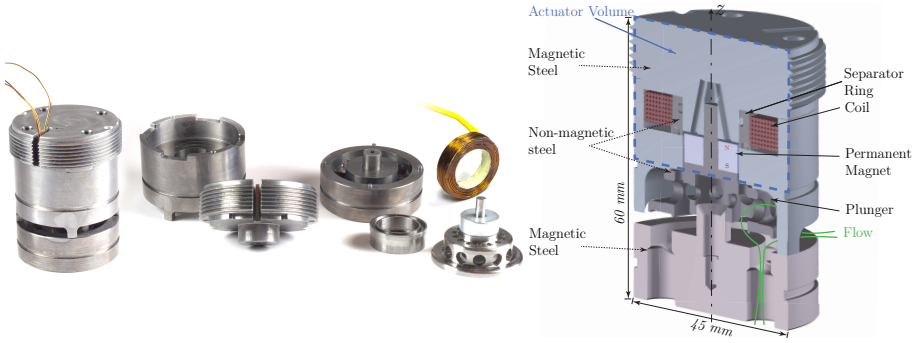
Manufactured MMA valve prototype (left) and sectional CAD-model view (right). This figure is also published in Paper J.
